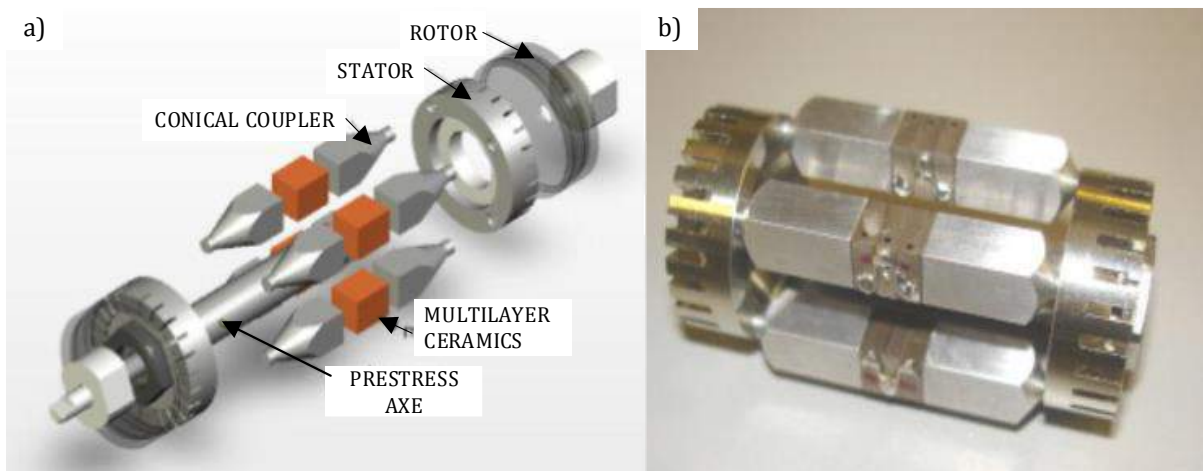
Complete structure of the multi-piezoelectric MLTWILA: a) exploded view b) assembled prototype [48]
